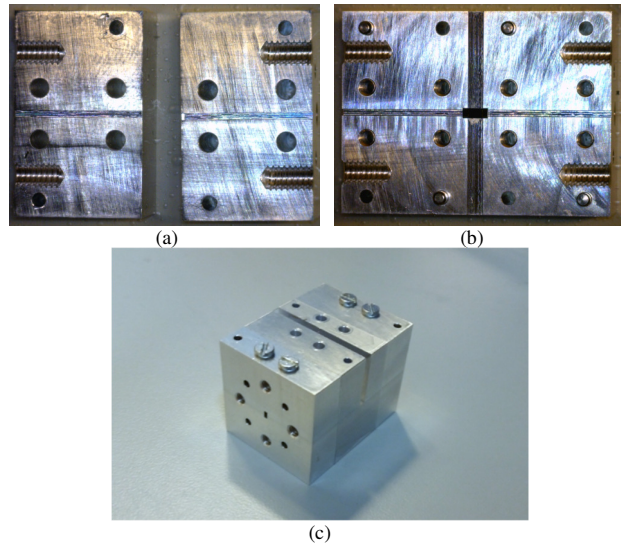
Photo of the fabricated waveguide split-block module (a) Top parts (b) Bottom part (c) Assembled module
